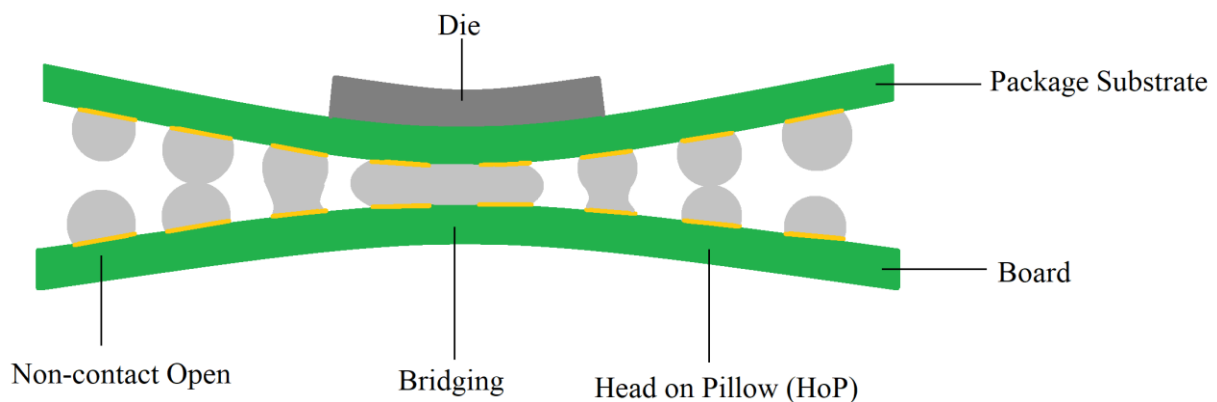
Schematic illustration of component warpage and different defects formed during reflow soldering
